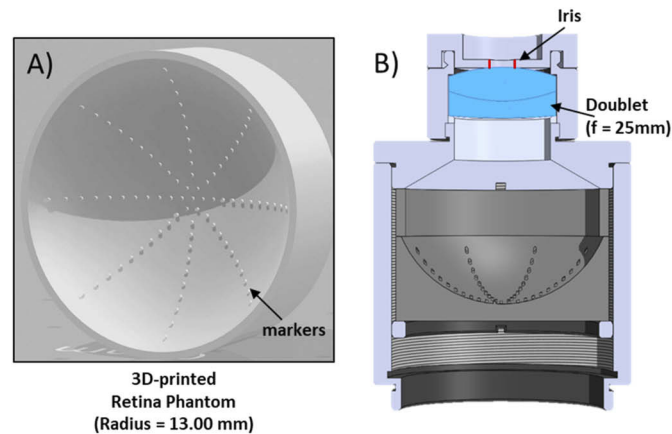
A) A 3D rendering of the printed plastic target with a bow shape surface and four rows of markers extruding from the surface ($R_c = 13.00$ mm). B) A cross-sectional view of the phantom eye.
